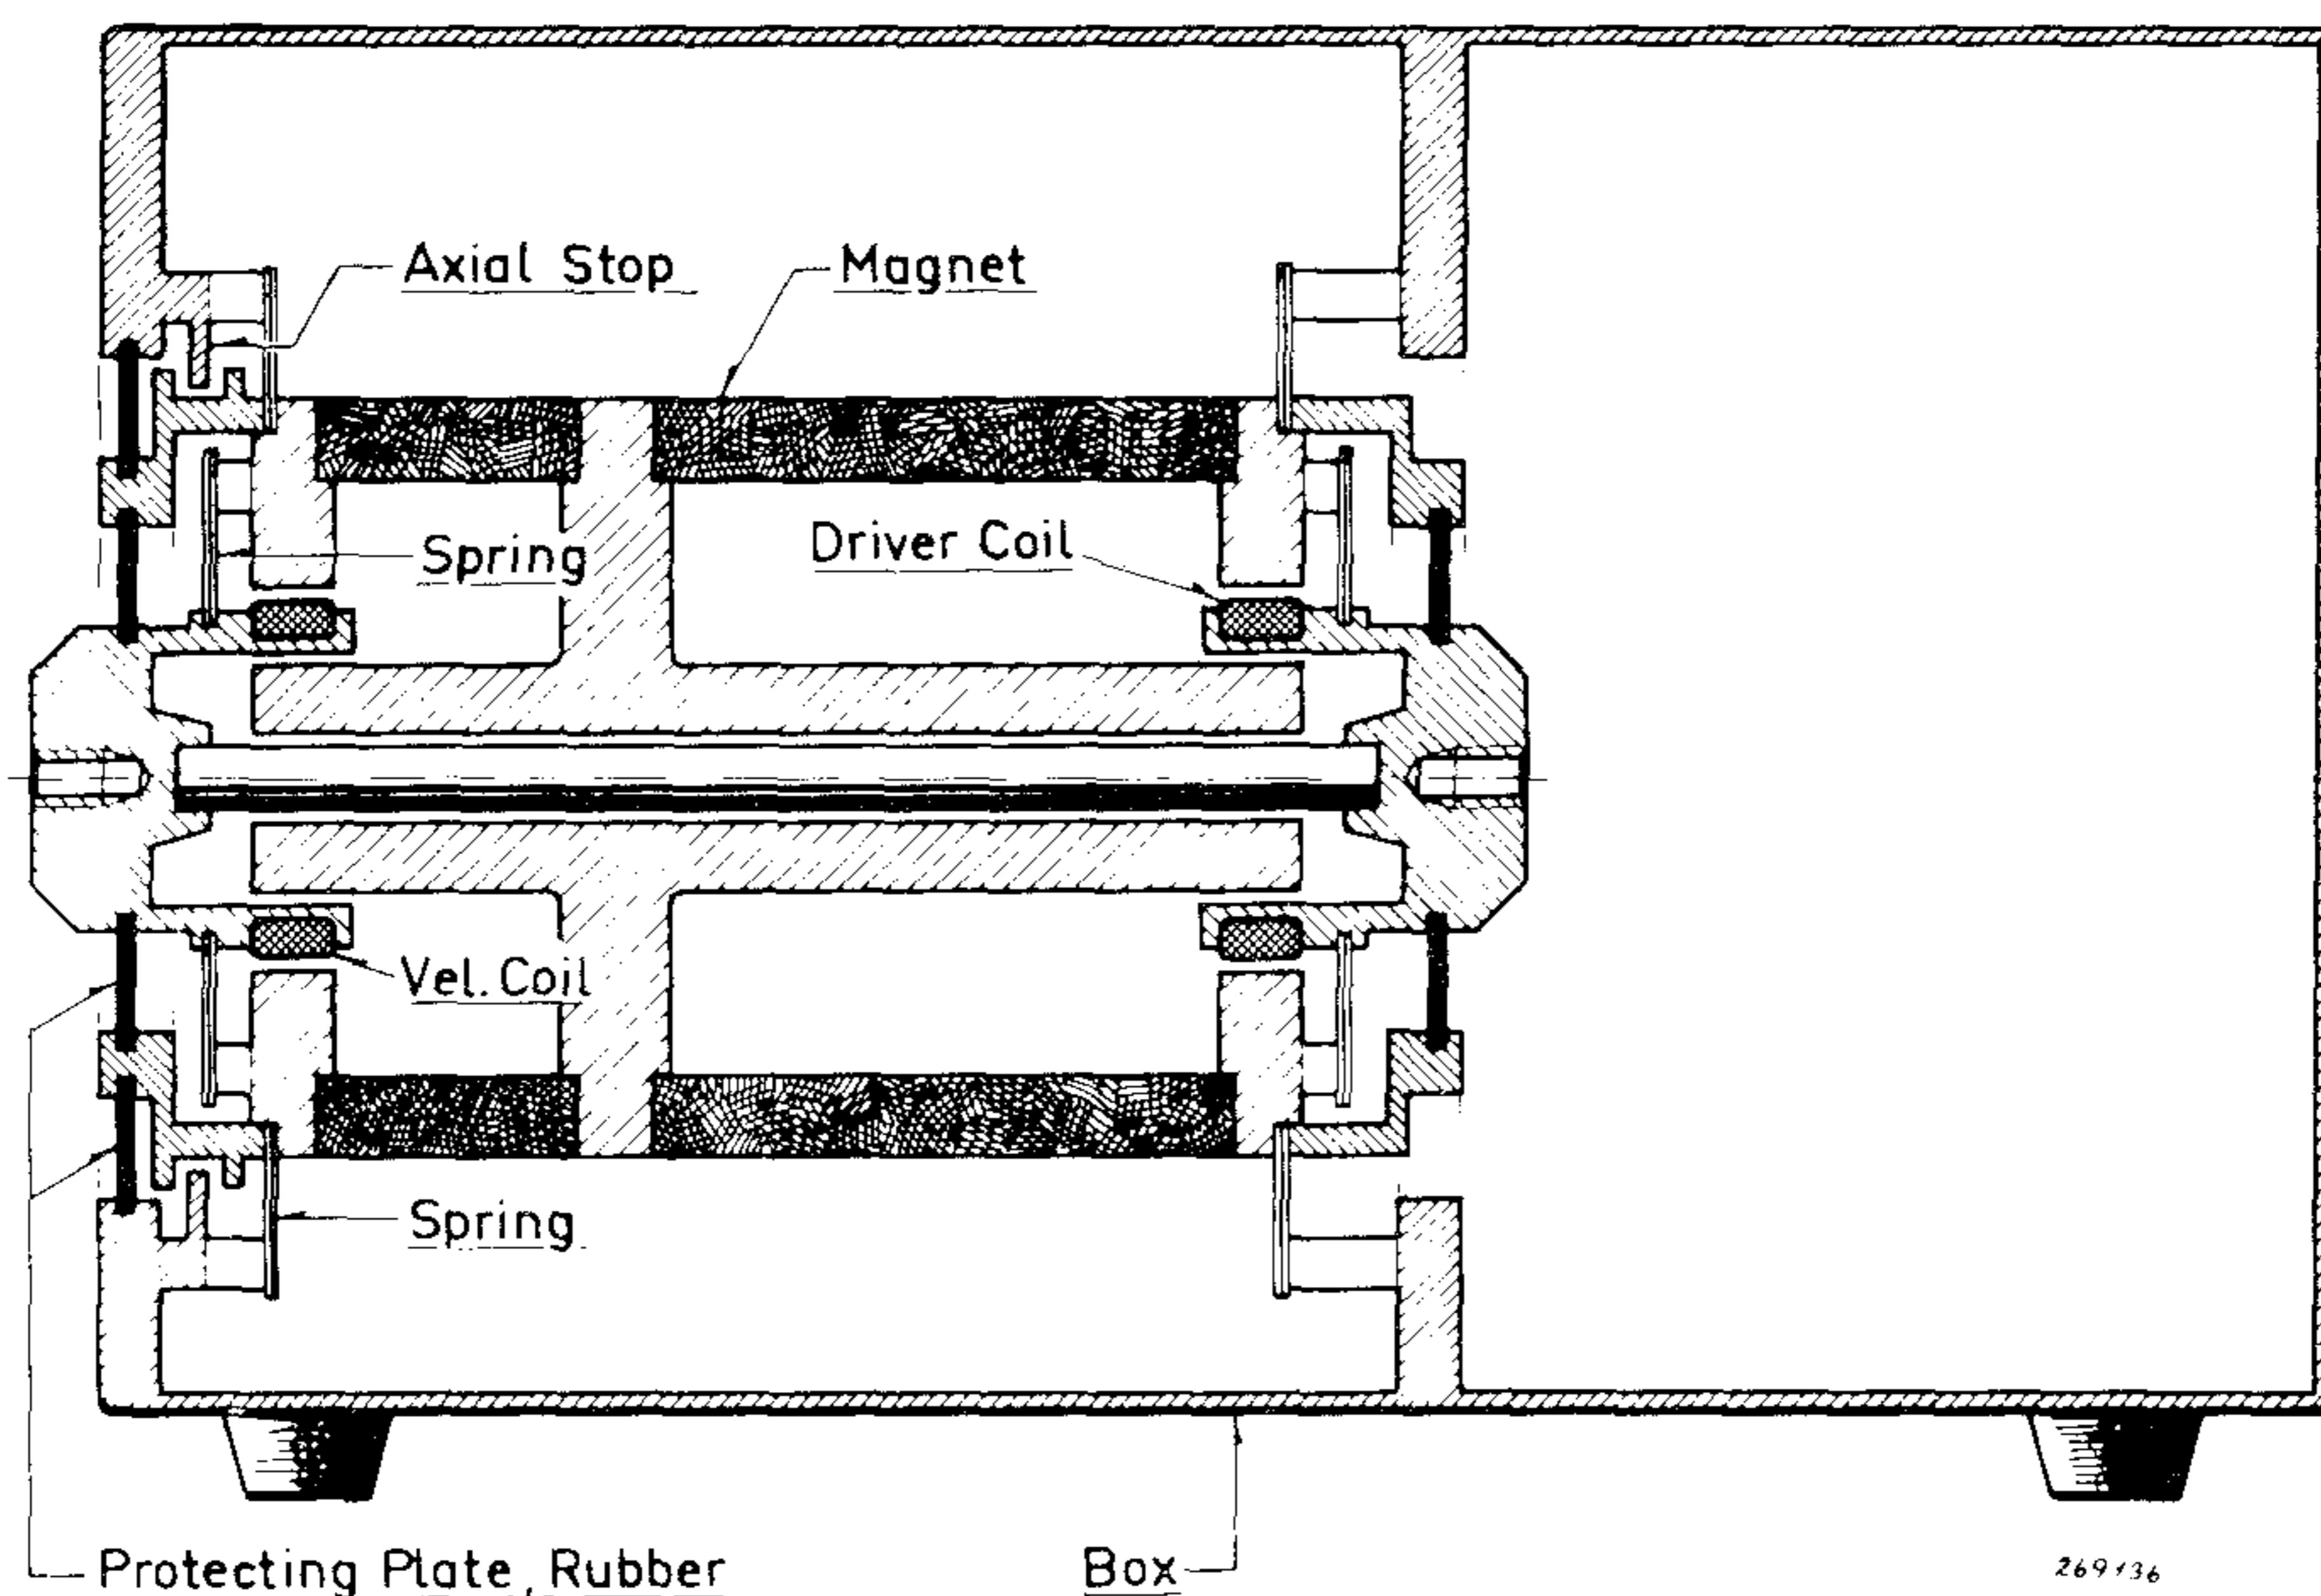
Cross-sectional view of the Accelerometer Calibrator Type 4291
